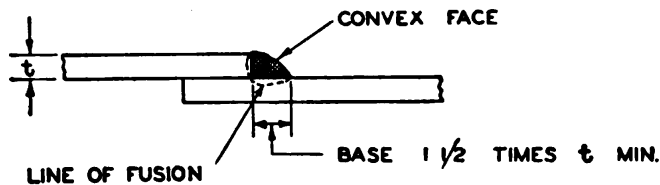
Weld metal specifications for fillet lap joints.
